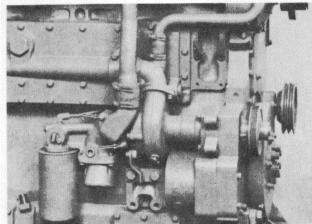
B-11. Remove the Water By-Pass Tube Assembly
